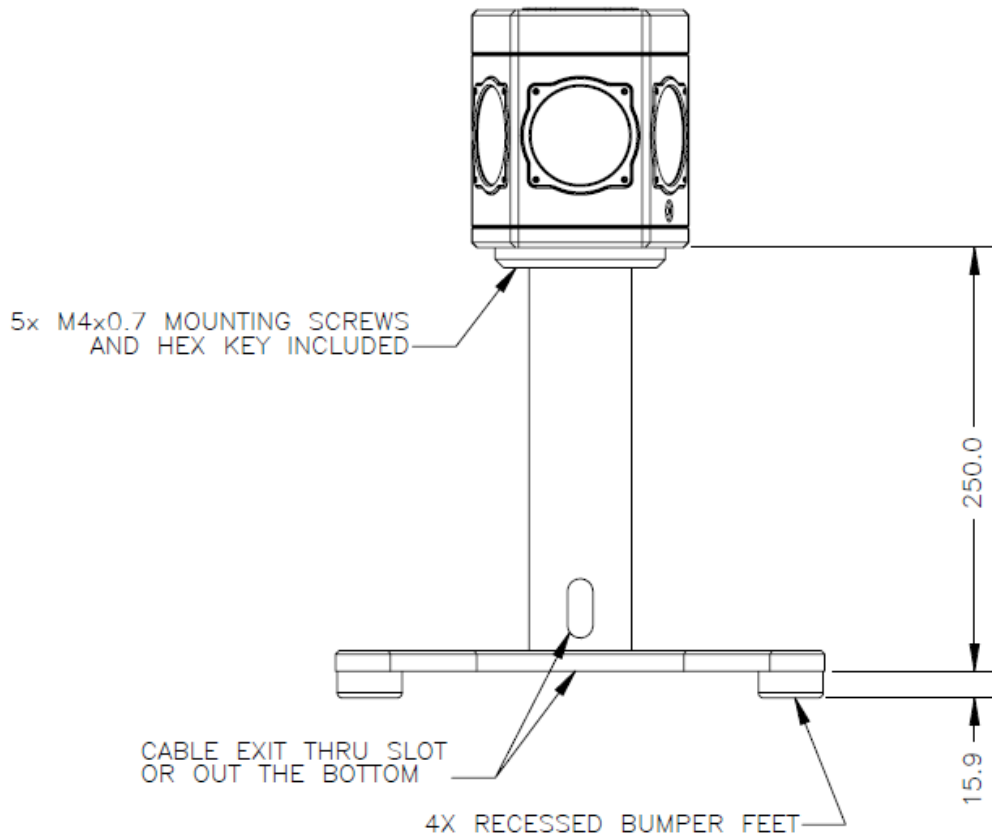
Mounting support dimensional drawing, side view (measurements in mm)
